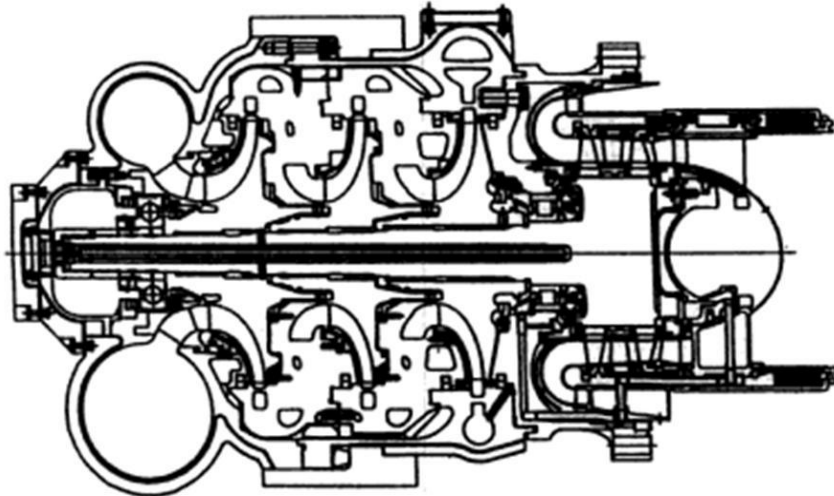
Space Shuttle Main Engine-High Pressure Fuel Turbopump (SSME-HPFTP),
